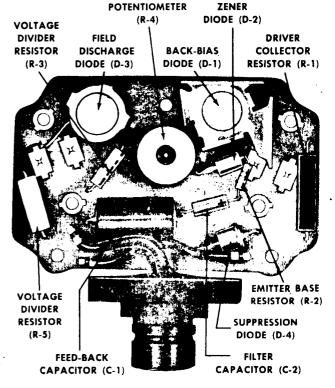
Identification of component parts (Parts keyed to Fig. 3).
